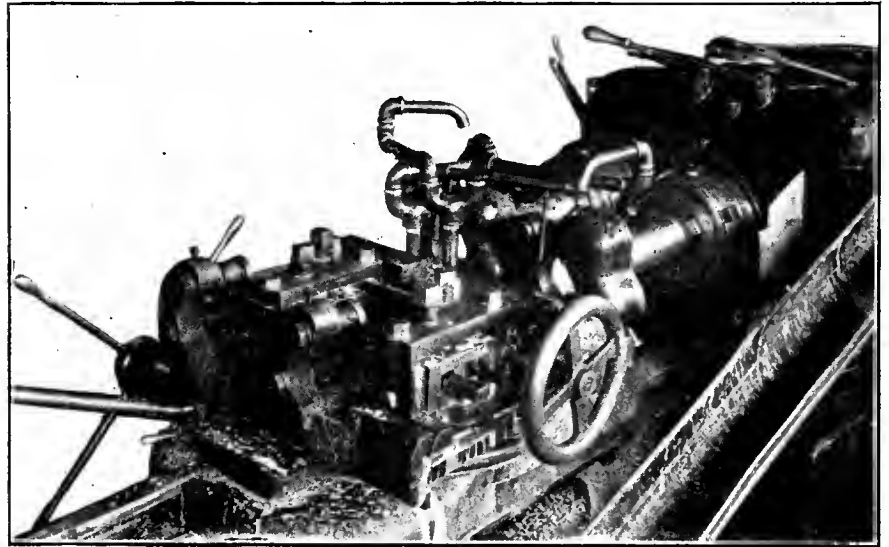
DOUBLE SPINDLE LATHES EQUIPPED WITH UNIT TOOL BLOCKS.
